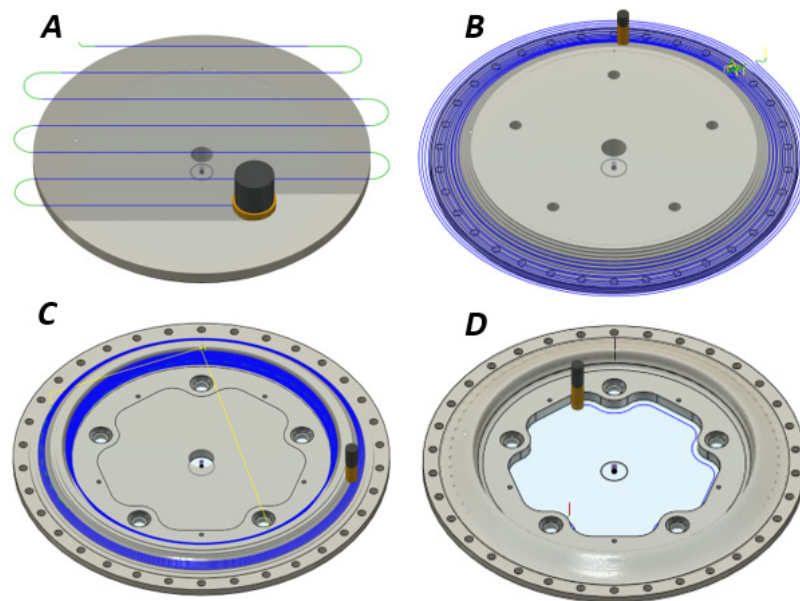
Wheel A machining operations: facing (A), roughing (B), smoothing (C), and finishing (D).
